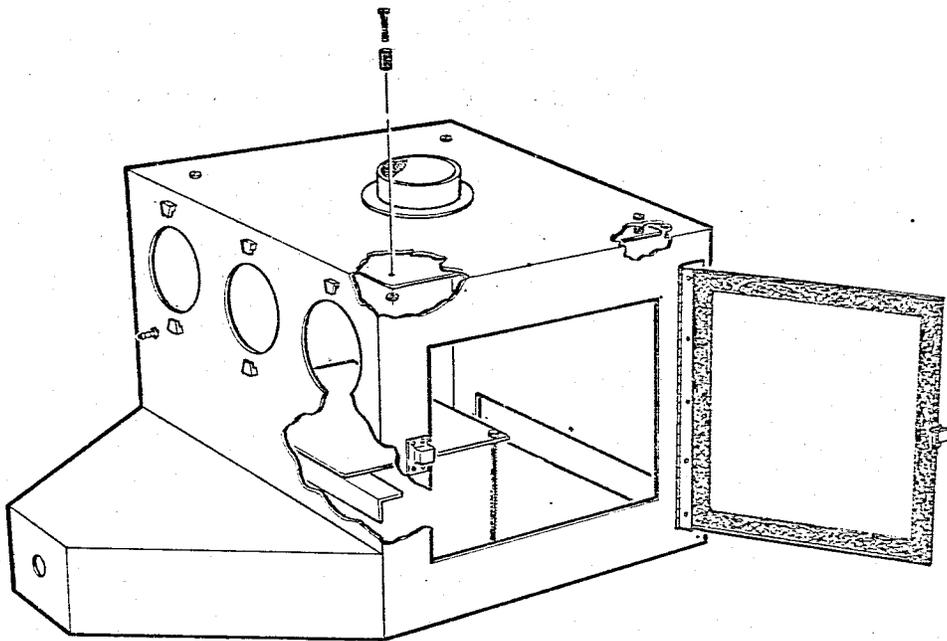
RESPIRATOR CARTRIDGE SAMPLE LOCATION
